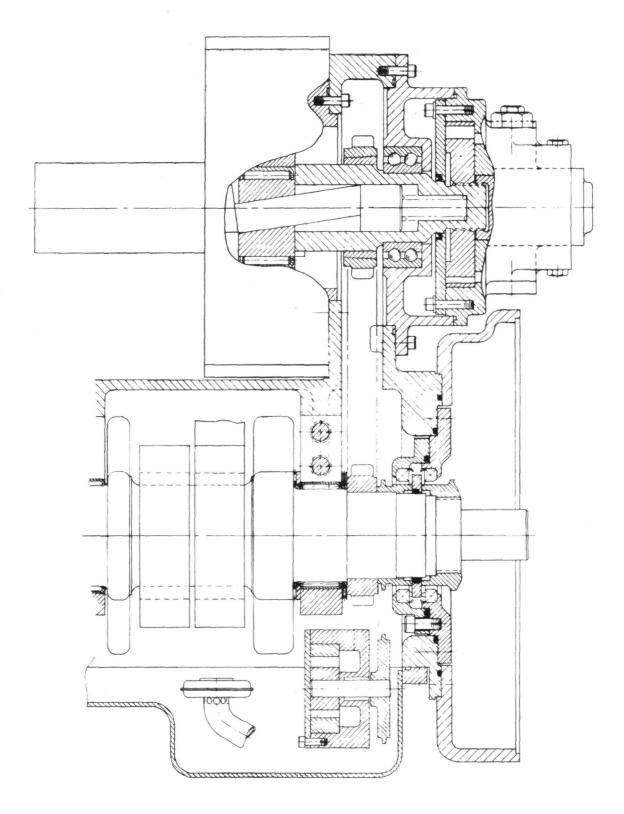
Expander Layout - Cross Section at Rear of Expander Showing Variable Displacement Vane Pump for American Bosch Hydraulic Valving System.
